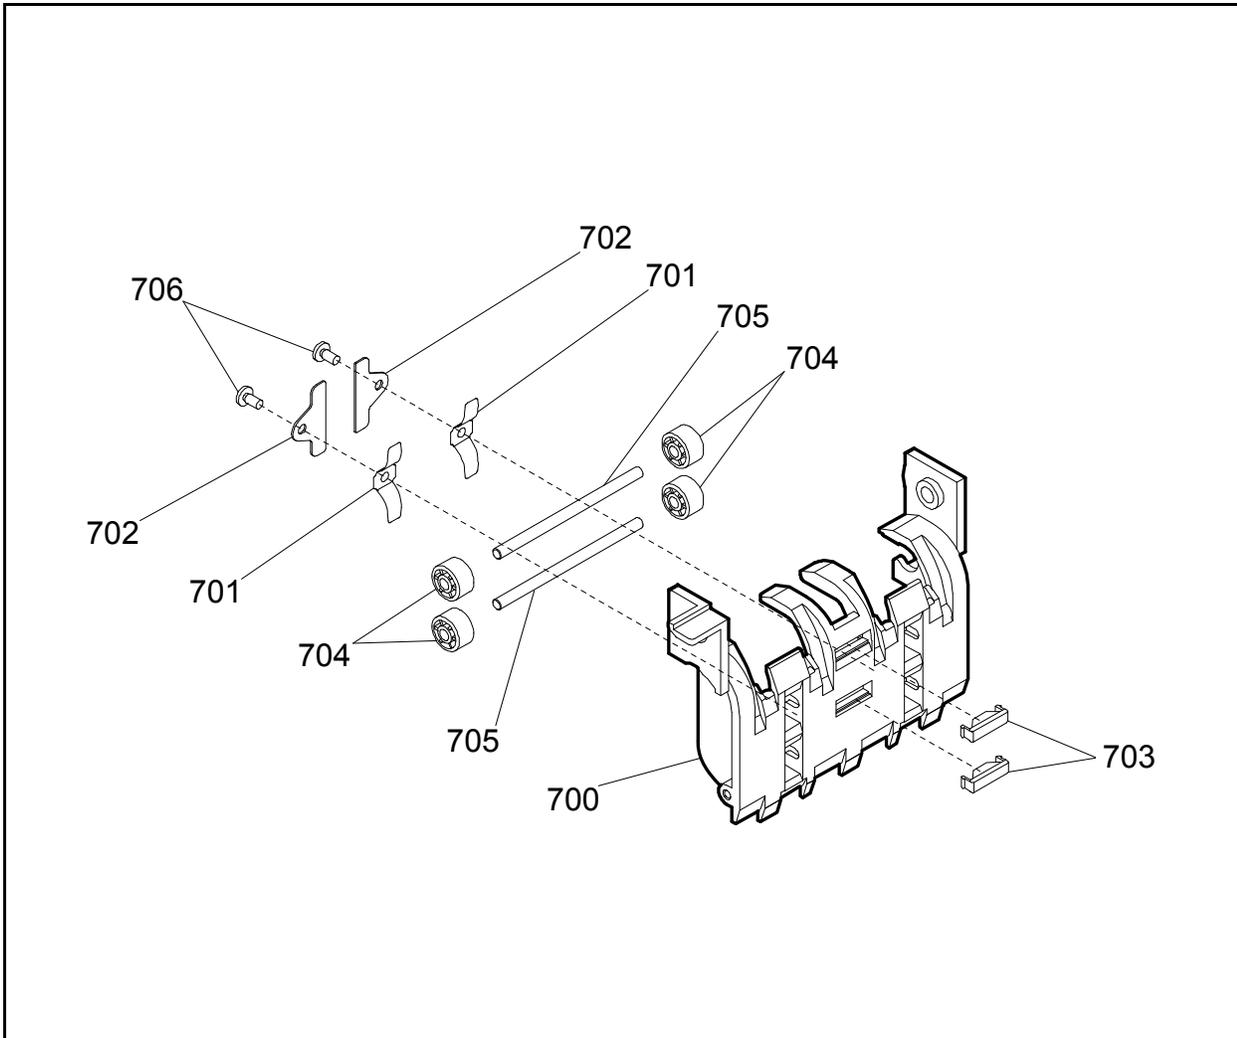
VEGA-RC Twin Lower Course Assembly Exploded View
